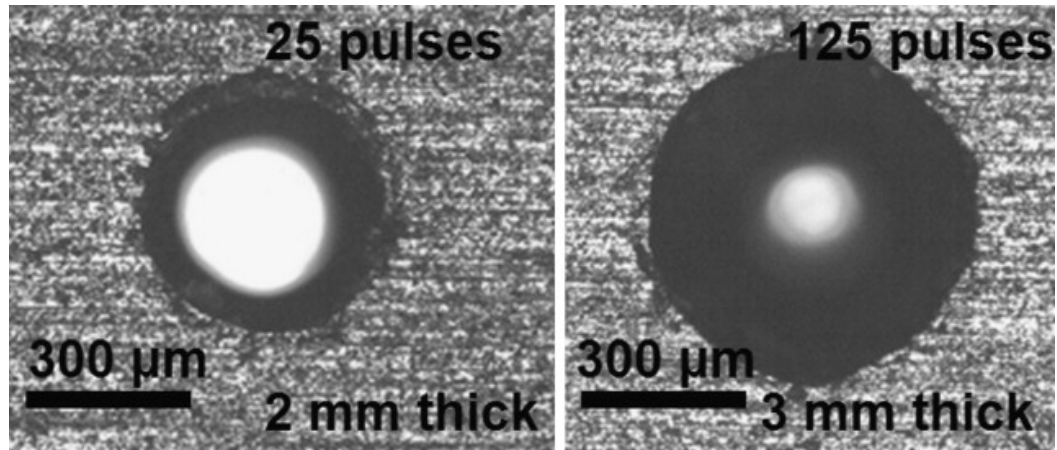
Laser micro machining in 2 and 3 mm thick SiC plates [108].
